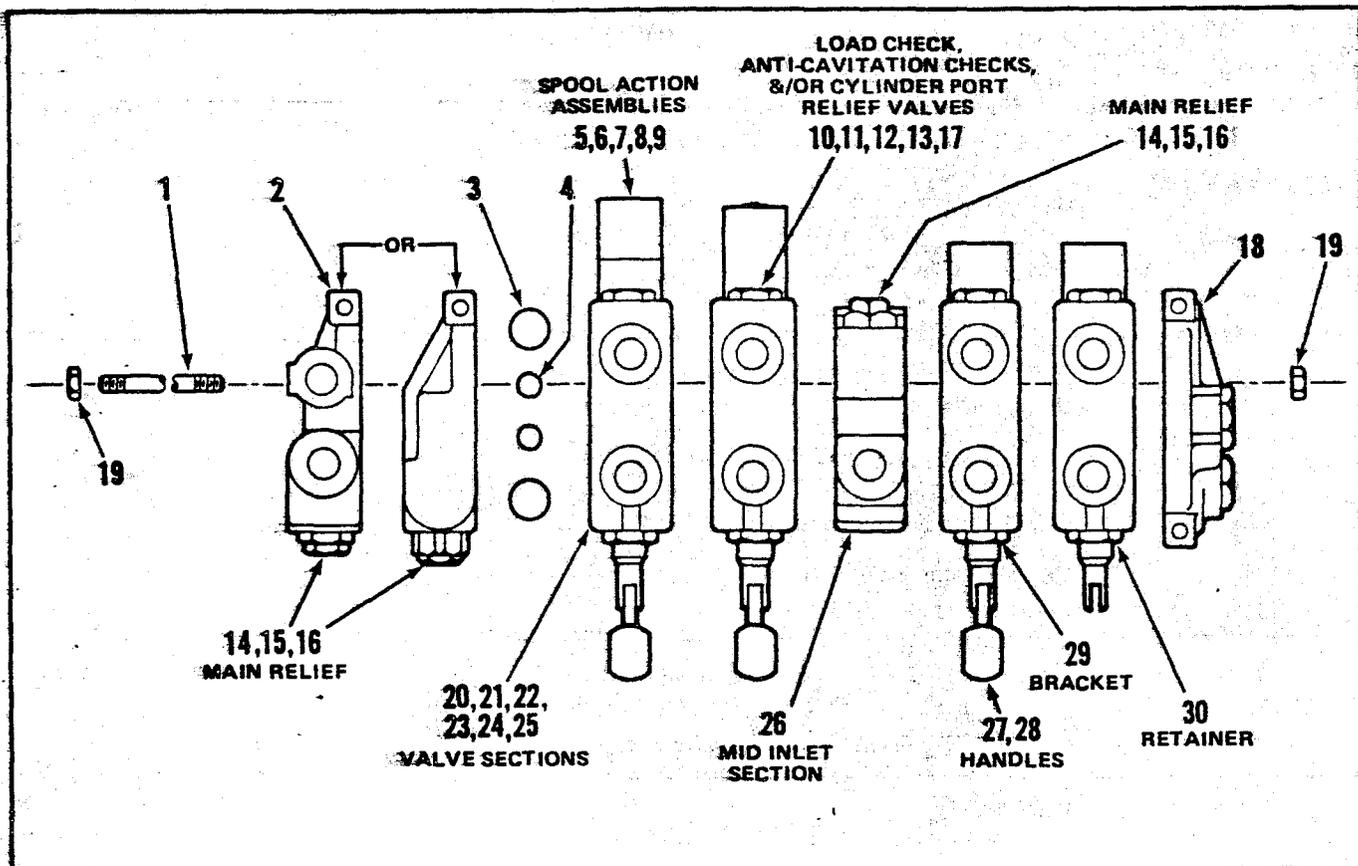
Model CP Directional Control Valve, Typical Main Assembly.
